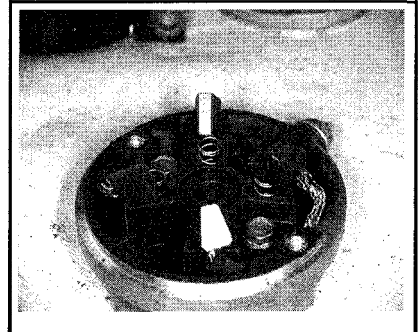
During assembly, position the brushes as noted during removal, and place the brush springs under each contact...
